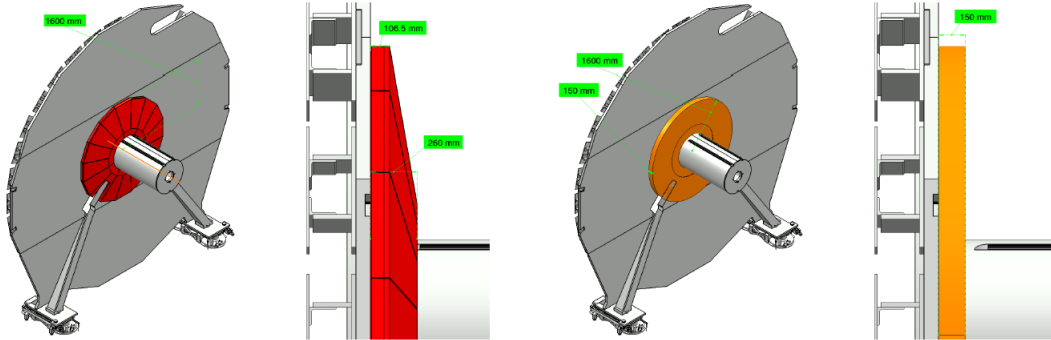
Side view of the JD shielding disc designs. The right side shows the modification of the conical design into a disk-like geometry to provide space for the full detector coverage.
